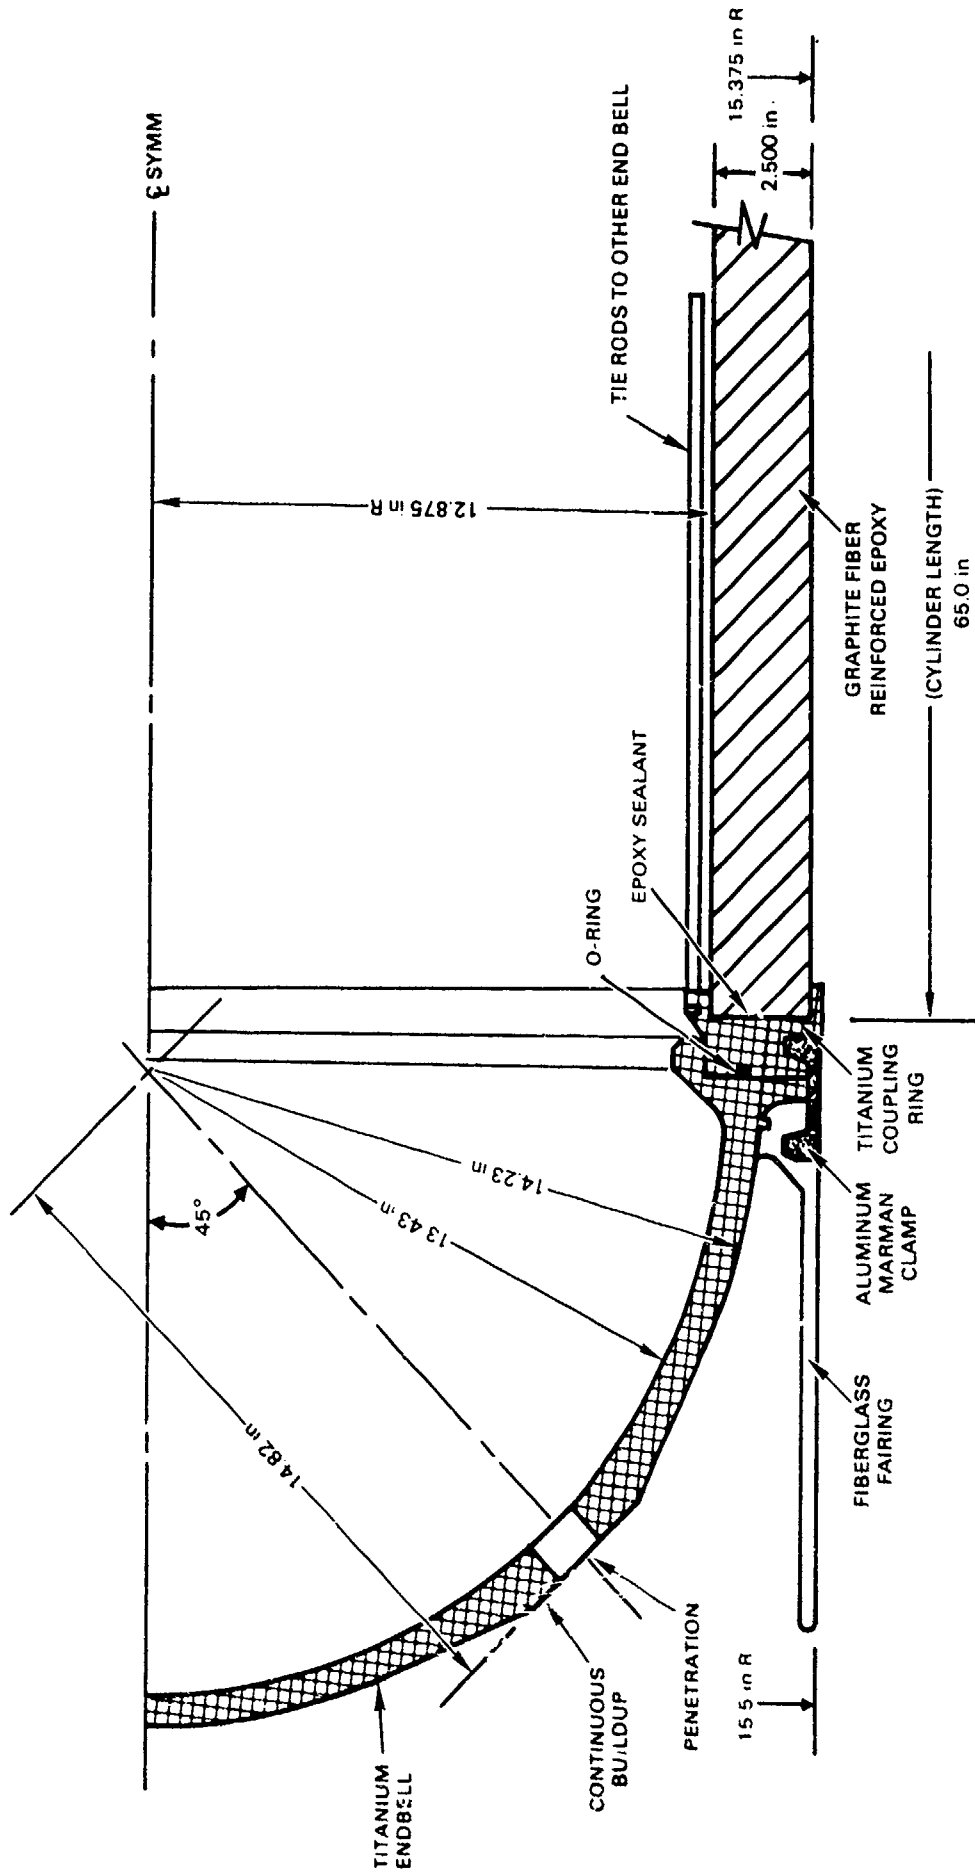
Components of the AUSS Mod 2 pressure housing assembly. It differs from the Mod 1 (Figure 7) assembly only in the shape of the coupling ring. The Mod 2 coupling ring provides radial restraint to both the external and internal cylindrical surfaces at the ends of the GFRP cylinder.
